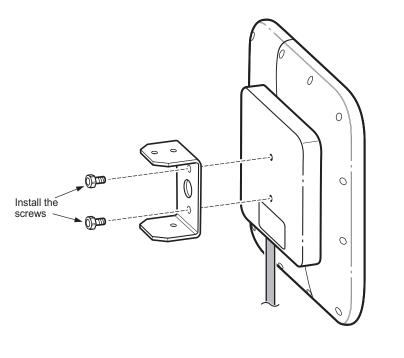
Attaching the mounting plate to the Nokia FastMile Outdoor Unit
